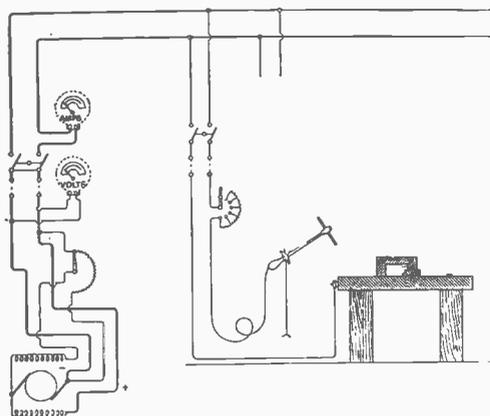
ELECTRIC ARC WELDING EQUIPMENT
